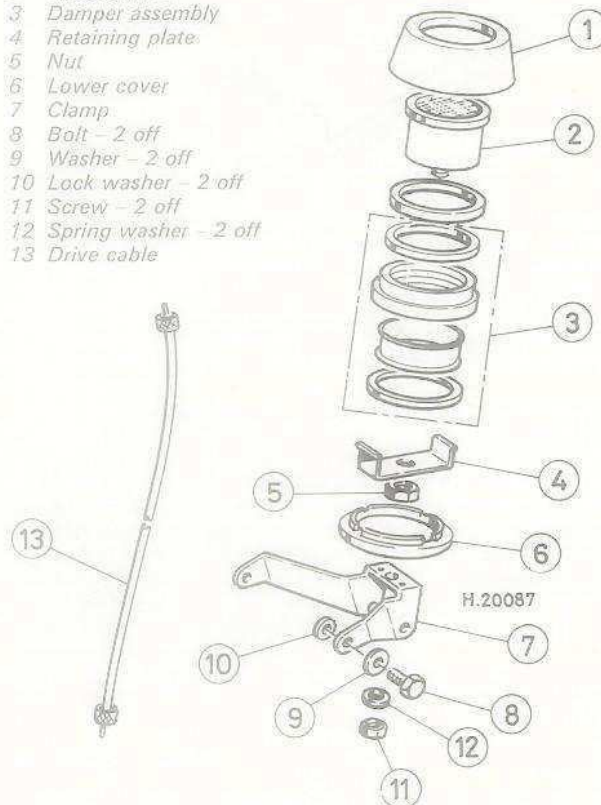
Speedometer assembly – PA50 DX VLS and VLM
